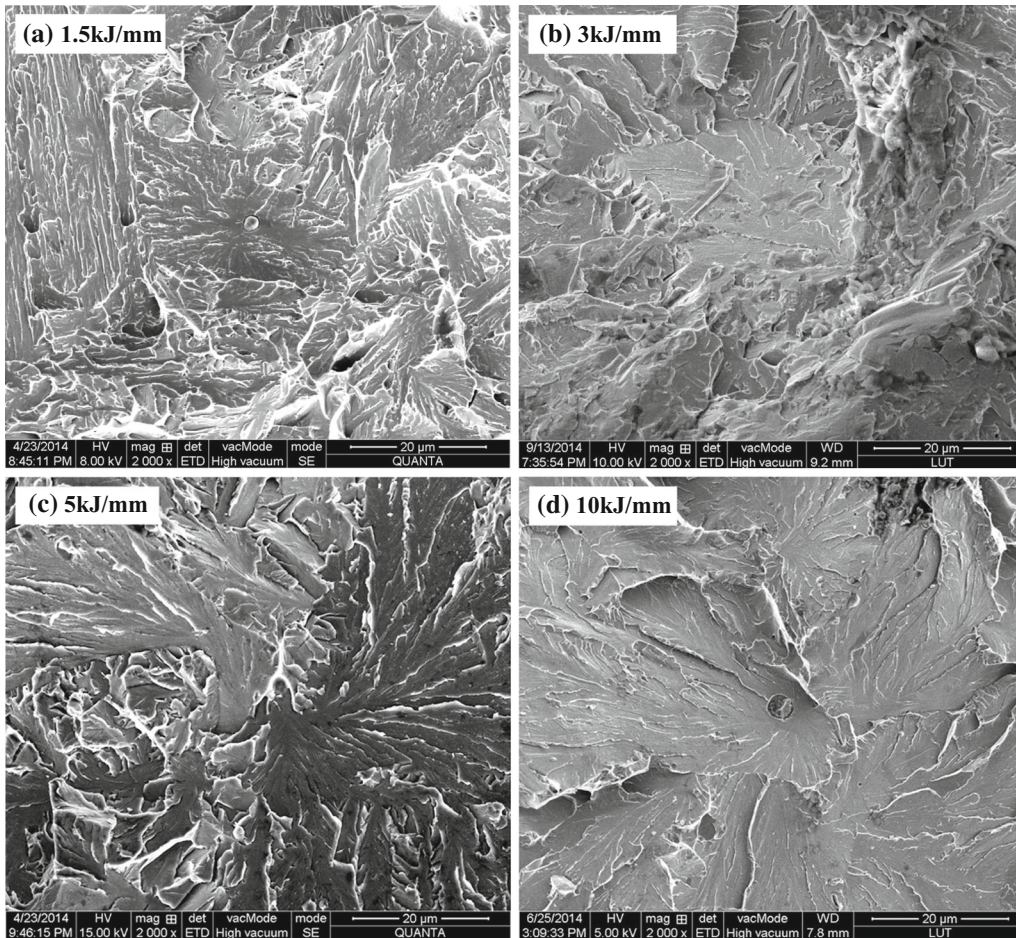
Fracture surfaces of Charpy V specimens with welding heat inputs of (a) 1.5 kJ/mm, (b) 3 kJ/mm, (c) 5 kJ/mm, (d) 10 kJ/mm fractured at 77 K (−196 °C).
